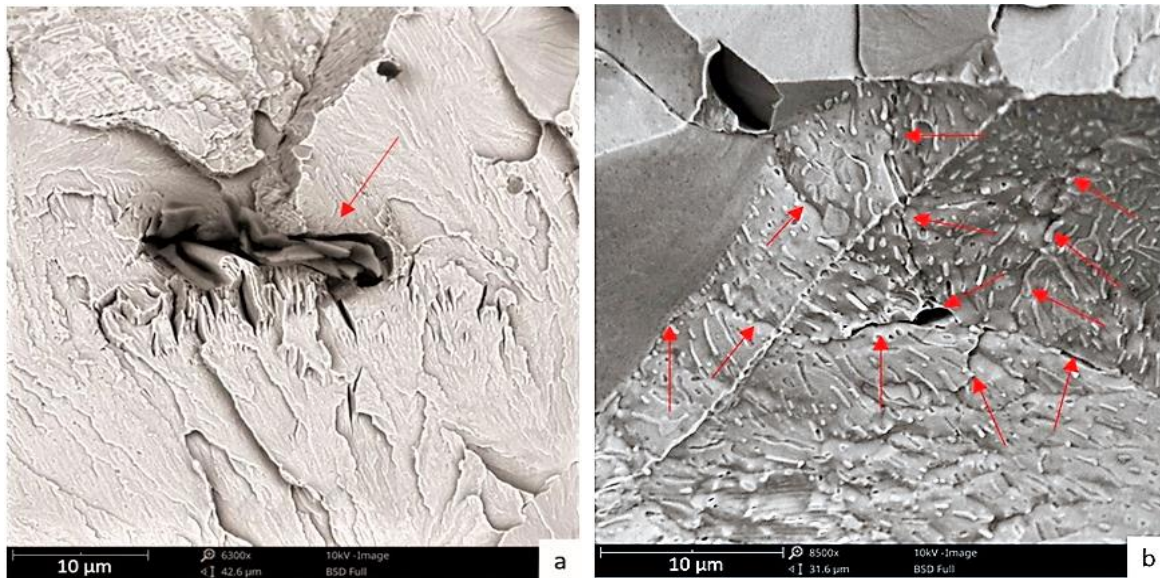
Furred (a) and unfurled (b) bifilms on the fracture surface of a ductile iron sample
